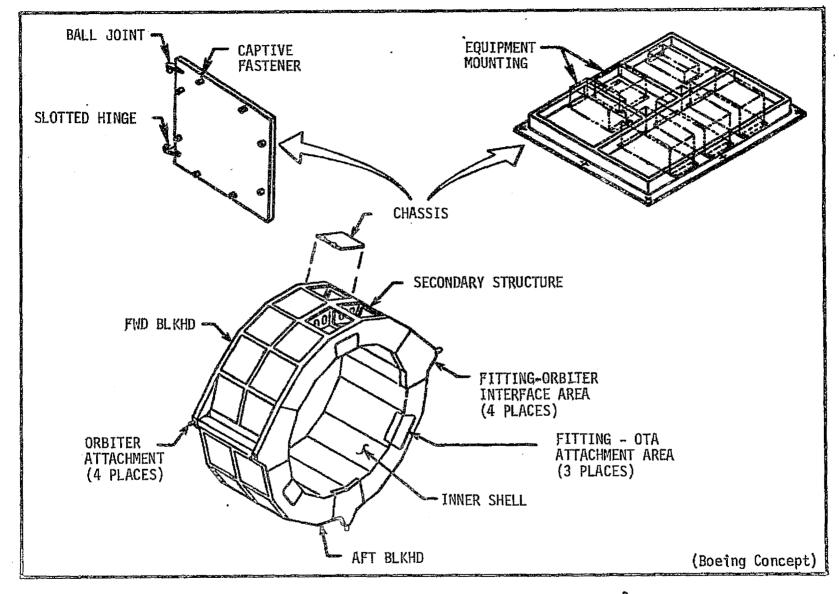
LST/SSM Equipment Section Structure Characteristics
